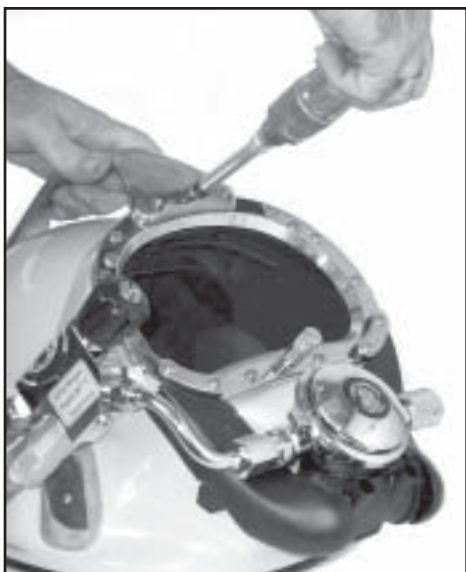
the handle is removed by unscrewing the top three port retainer screws.
